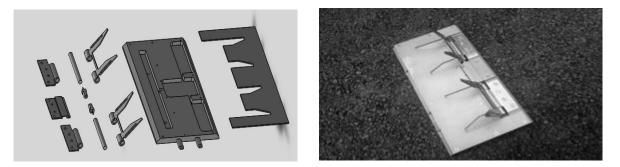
New tire breaker: (a) The explosion figure, (b) The prototype.
